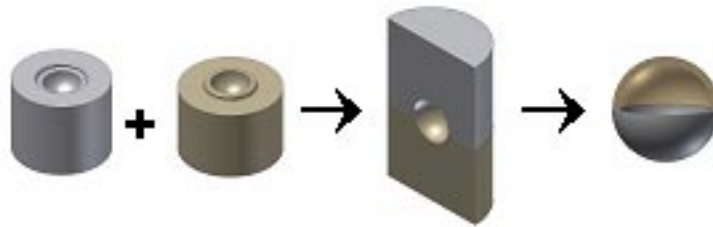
Precision machining approach to fabricating Be0.9%Cu capsule.
